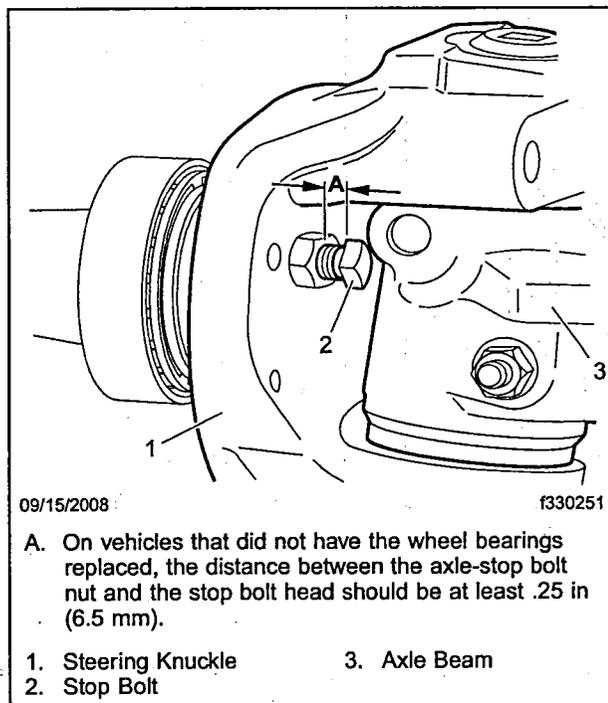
, Stop Bolt, Gap Between the Nut and Head
